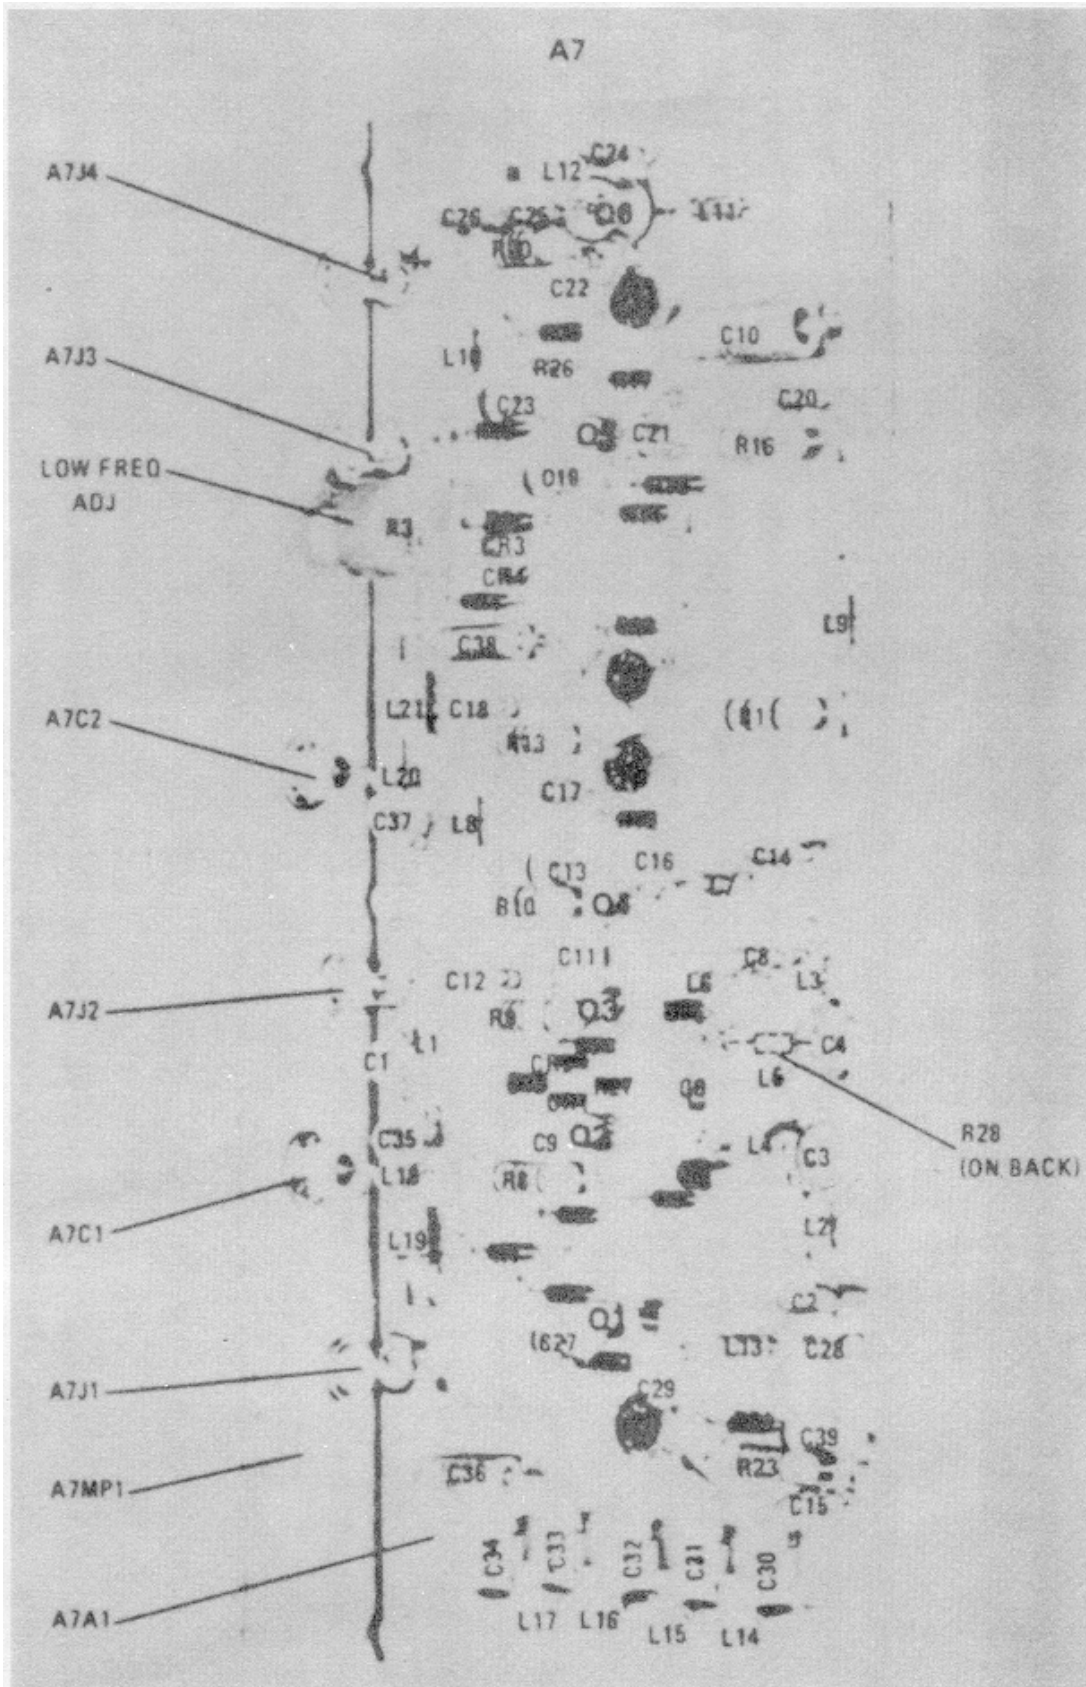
200 - 310 MHz VTO Assembly A 7 (08553-6003) Component Locations (ERRATA)
